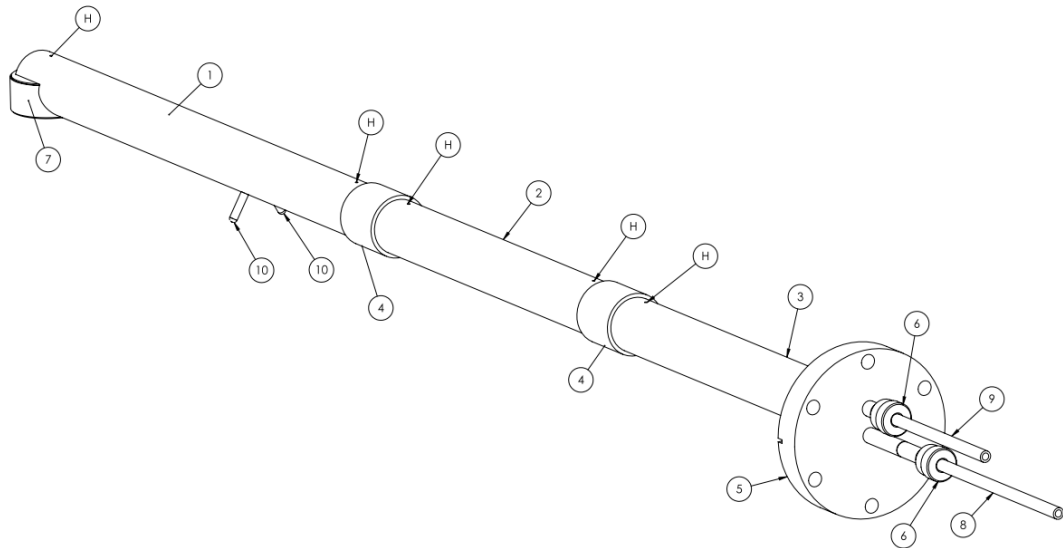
Major components of CVD cooling assembly. Major assembly components are numbered. Item 7 is the *sample cooling chamber*, items 1, 2, and 3 are the *insulating sleeves*, and item 5 is the *endcap*. Items 8 and 9 are the chilled water *inlet and outlet tubes*.
